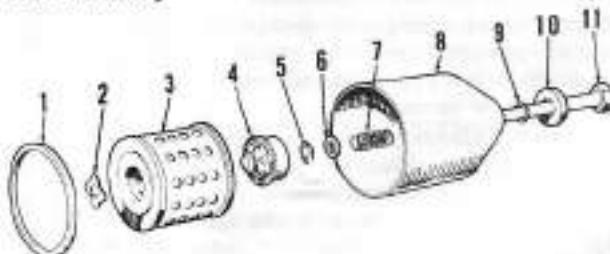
Exploded view of oil filter. Proper installation is quite important because the by-pass valve (4) cannot operate properly if unit is not assembled as shown. On any complaint of incorrect oil pressure, the unit should be checked for proper assembly and a new filter element of correct type installed. Refer also to cross-sectional view in Fig. 47.
